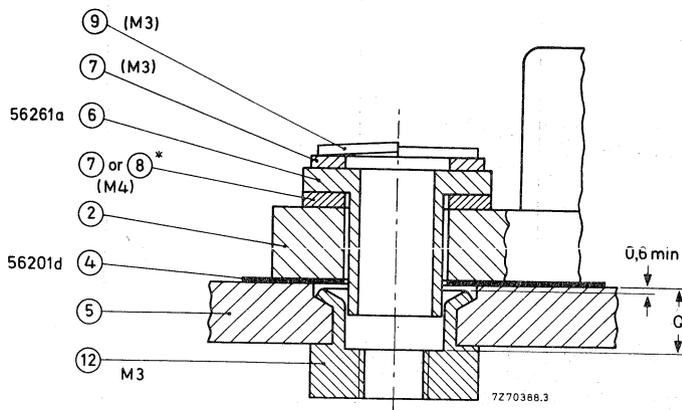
Assembly (partial) for Fig. 10 - insert nuts Q minimum 2,5 mm.
